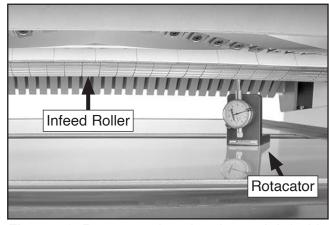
Rotacator placed underneath left side of infeed roller (shown from rear of machine).
